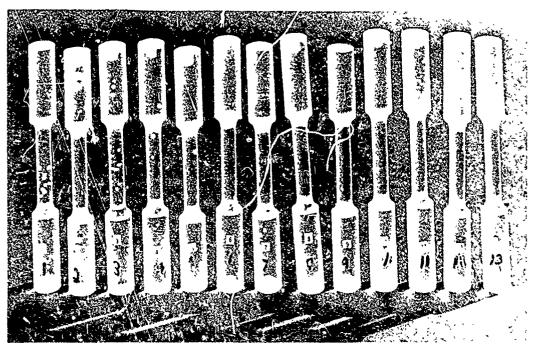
Tensile specimens machined from the same massive acrylic plastic castings 0.500 inch in diameter by 5,000 inches long.
